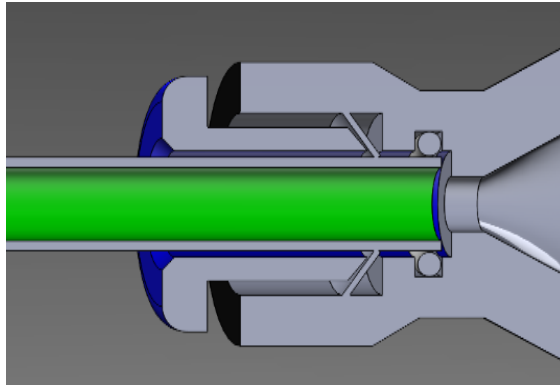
Push to Connect Diagram. Push tubing past locking ring and O-ring to produce a proper seal. Push locking ring to release.
